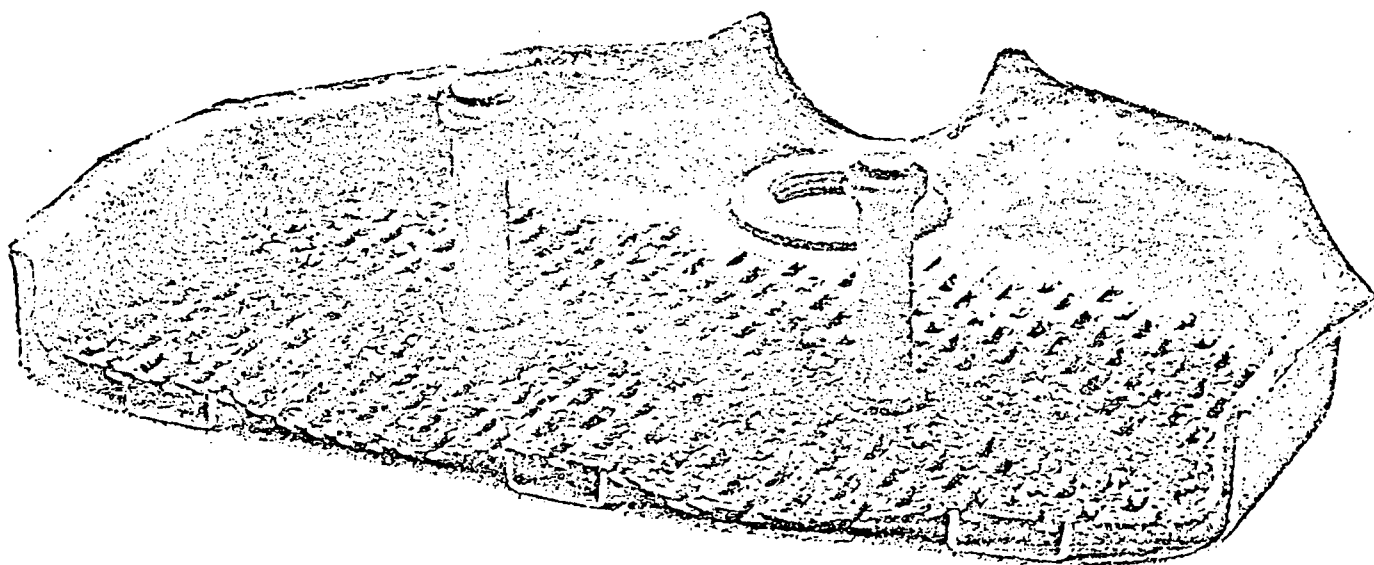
Lower retainer section of underfloor converter from R6908 Cutlass (1/8 MMT fuel)
